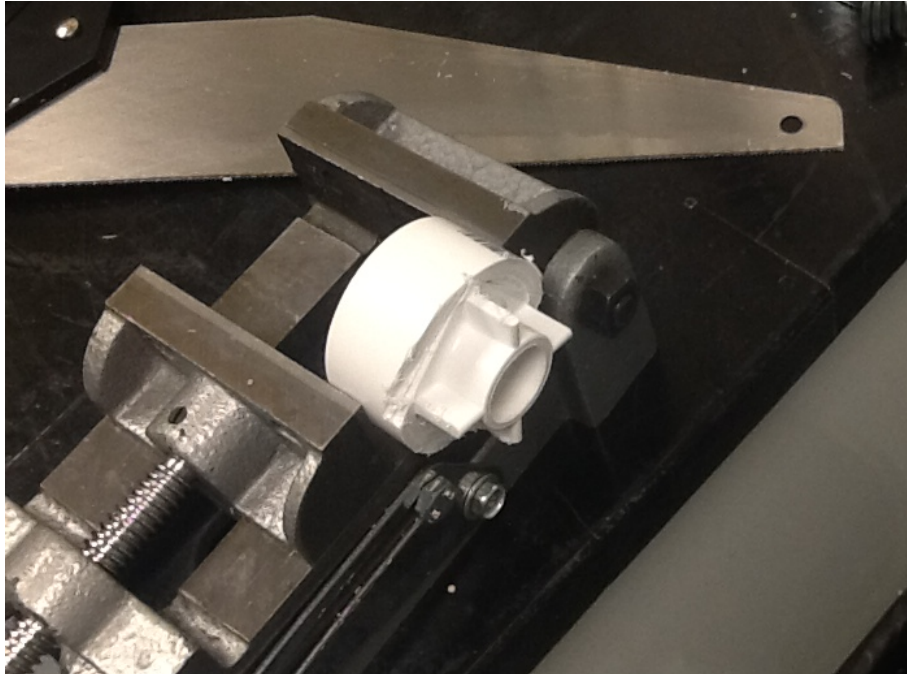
Fabrication of filter supports step 5. The bushing was clamped into a vice so that the frame could be removed with a PVC saw. Note that the outer edge of the frame has a smooth surface remaining from the original manufacture.
